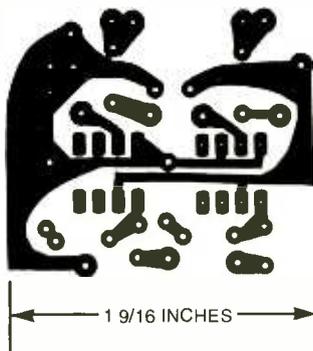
The author's prototype of the circuit was assembled on a printed-circuit board, measuring 1 $\frac{9}{16}$ by 1 $\frac{7}{16}$ inches. A full-size template of the author's board is shown here.
